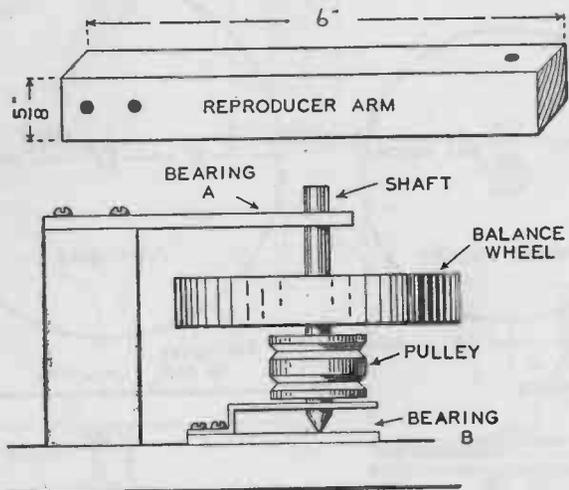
The arm which supports the reproducer is shown in the upper part of the illustration. The lower sketch shows the balance wheel and its pulleys.
